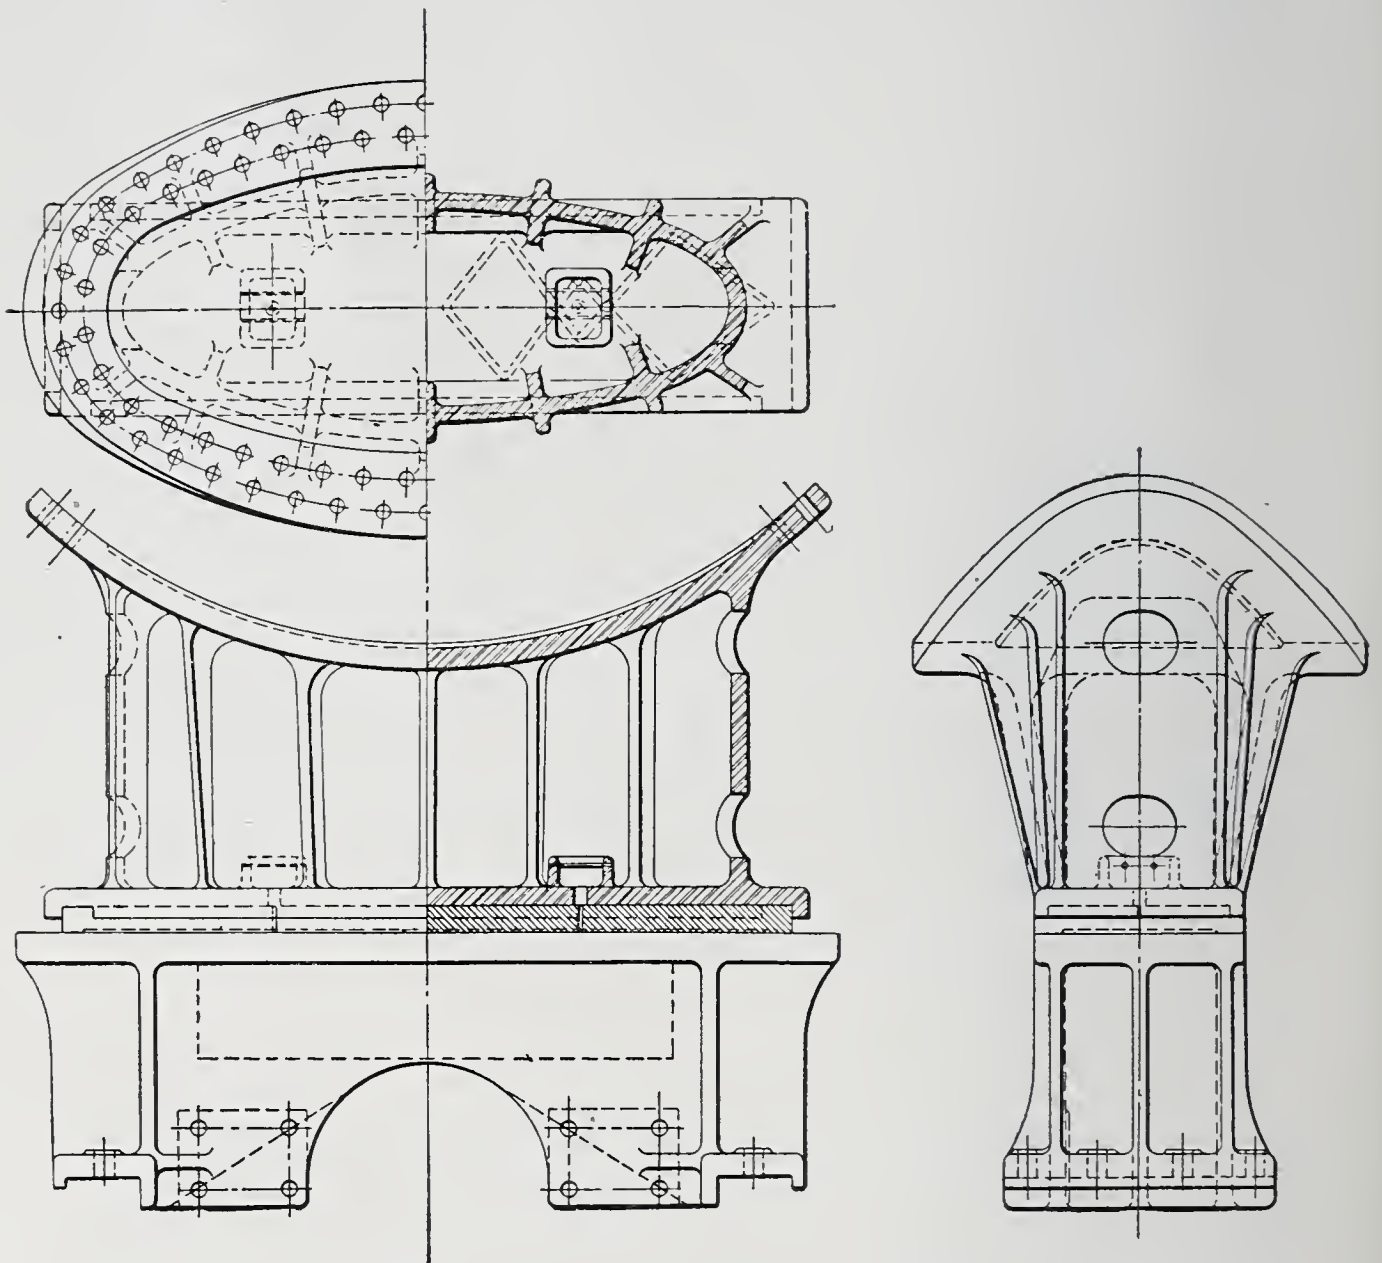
WAIST BEARER, SUPPORTING FRONT END OF BOILER.
